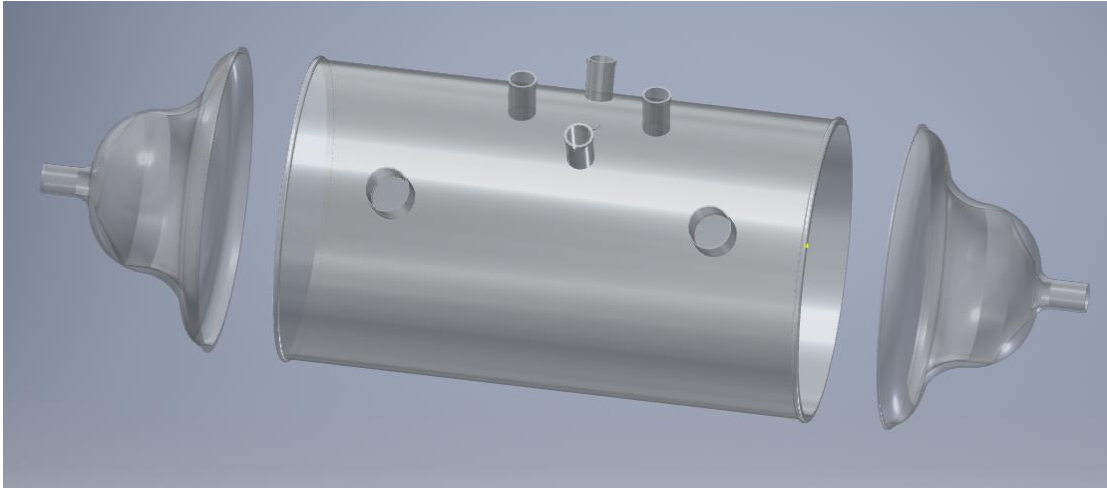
CAD of the prototype chamber that TUDOR Scientific produced
